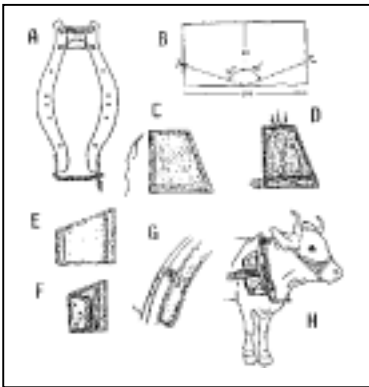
Some strage in the manufacture of a 3-pad harness. A - Harnes assembly; B - Cutting jute sacking; C - Sewing sacking; D - Stuffing pads; E,F - Folding pads; G - Typing pad to hame; H - Final harness. Source: after Micuta, 1984
